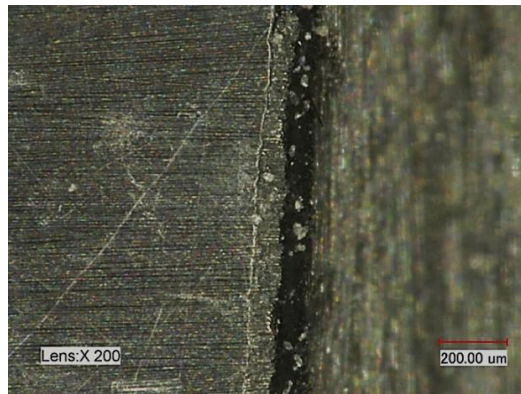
Close view of the ellipse shape's edge machined using metal mask.
